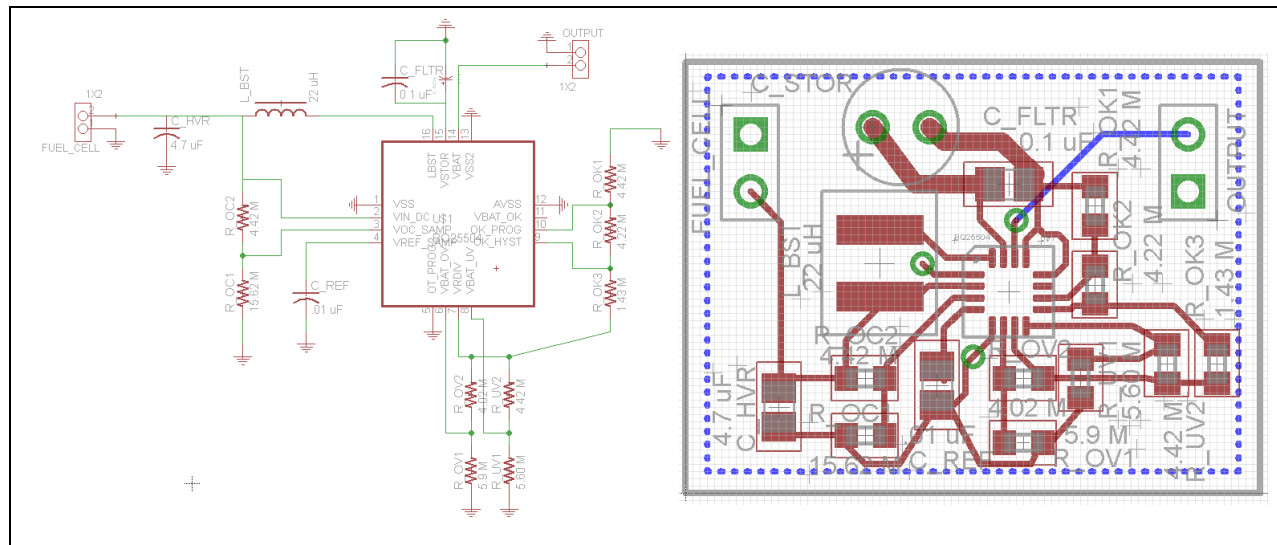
Power converter for paper-based hydrogen fuel cell. Left: Schematic. Right: PCB layout.
